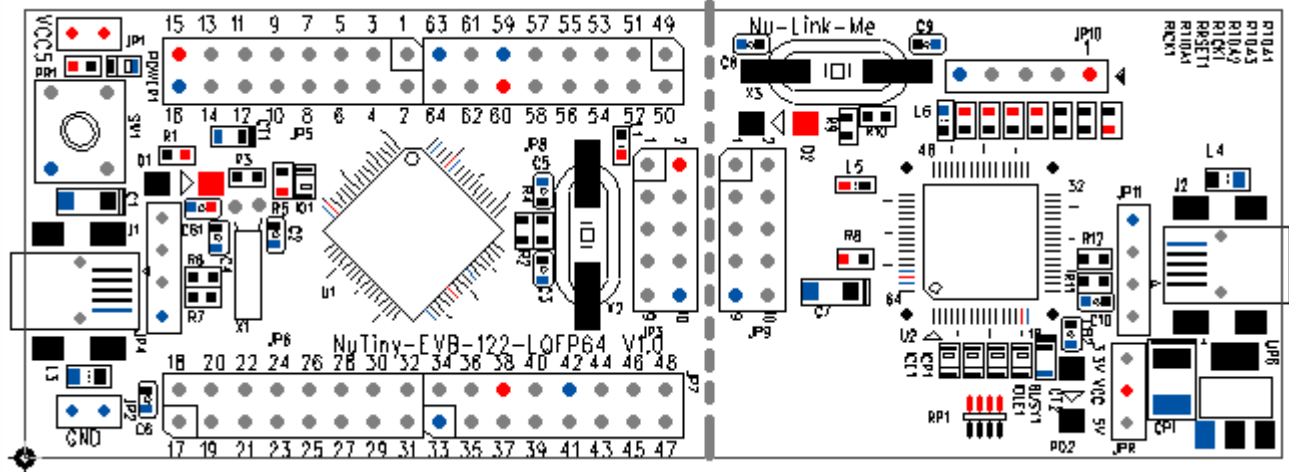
NuTiny-SDK-NUC122-64P PCB Placement
